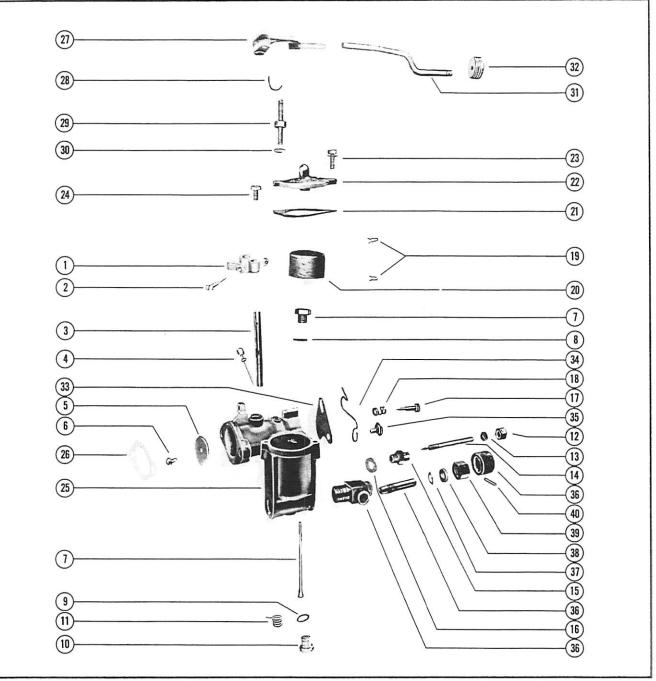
Gravity Feed Carburetor, Shut-Off Valve and Choke
